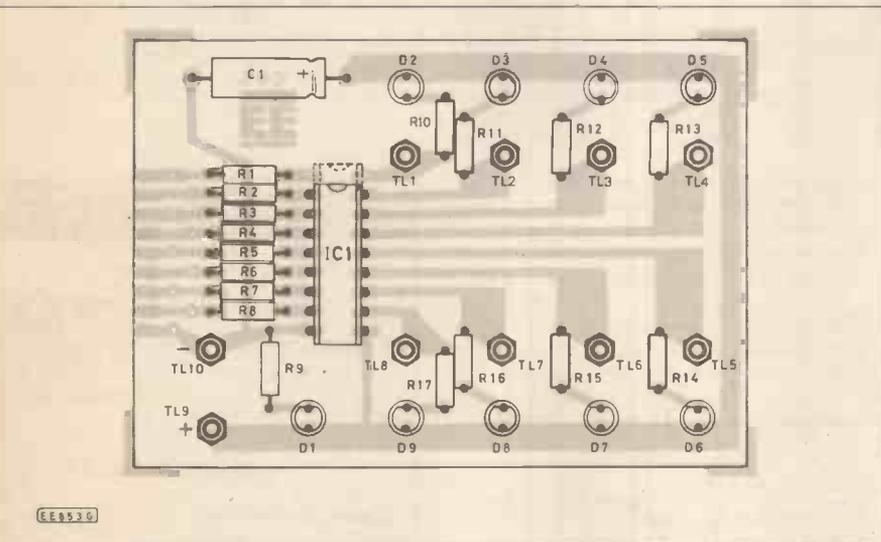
(above left) Printed circuit board component layout. For details of connections to the computer refer to the circuit diagram. (left) The full size printed circuit master pattern. This board is available from the EE PCB Service—see page 172. (above) The completed board showing the connecting terminals (TL) and the l.e.d. indicators.
